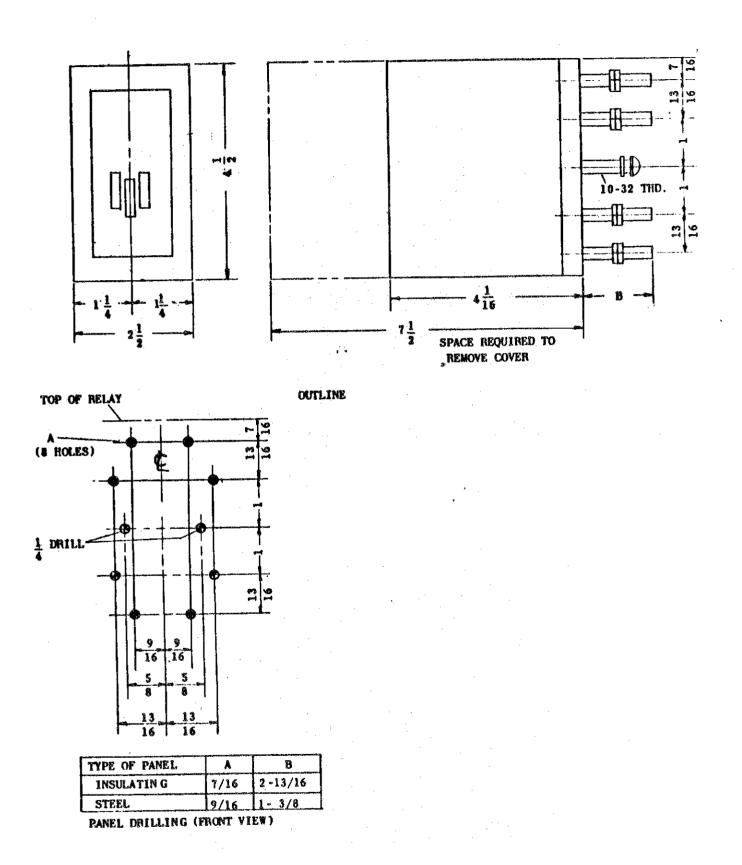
(0148A3979-5) Outline And Panel Drilling Dimensions For The Projection Mounted NGA15AB Relay
